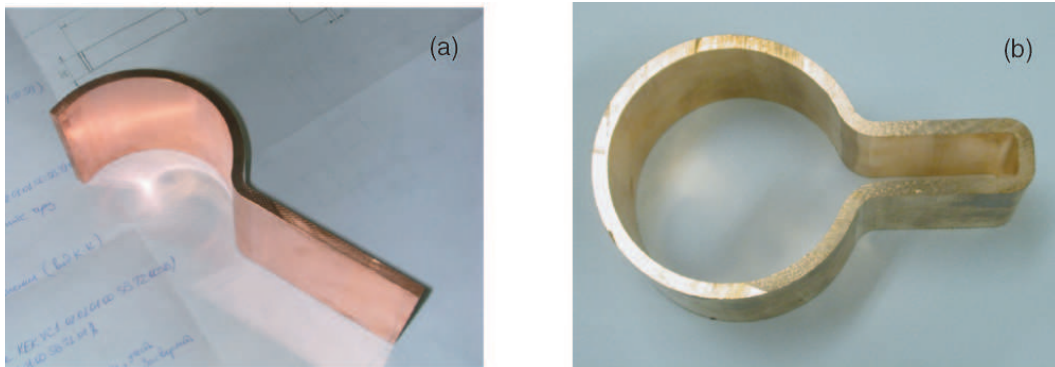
(a) Stamped plate and (b) drawn ante-chamber.
